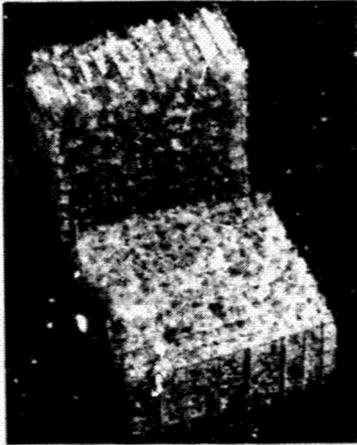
Fixture for Vacuum Assist Foam Fabrication
